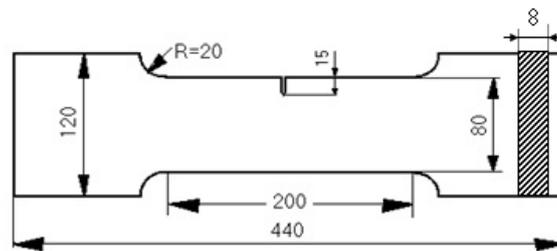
Fatigue Specimen (SENT) (all dimensions are in mm)
